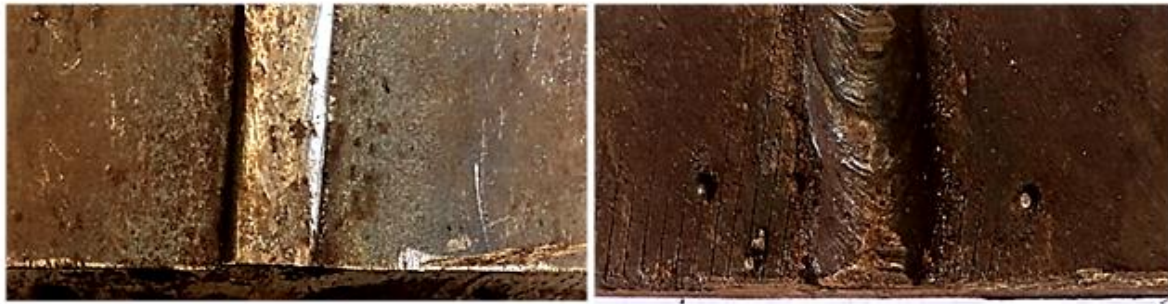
X52 steel pipes by arc welding, a)Manuel welding, b) Automated welding.
